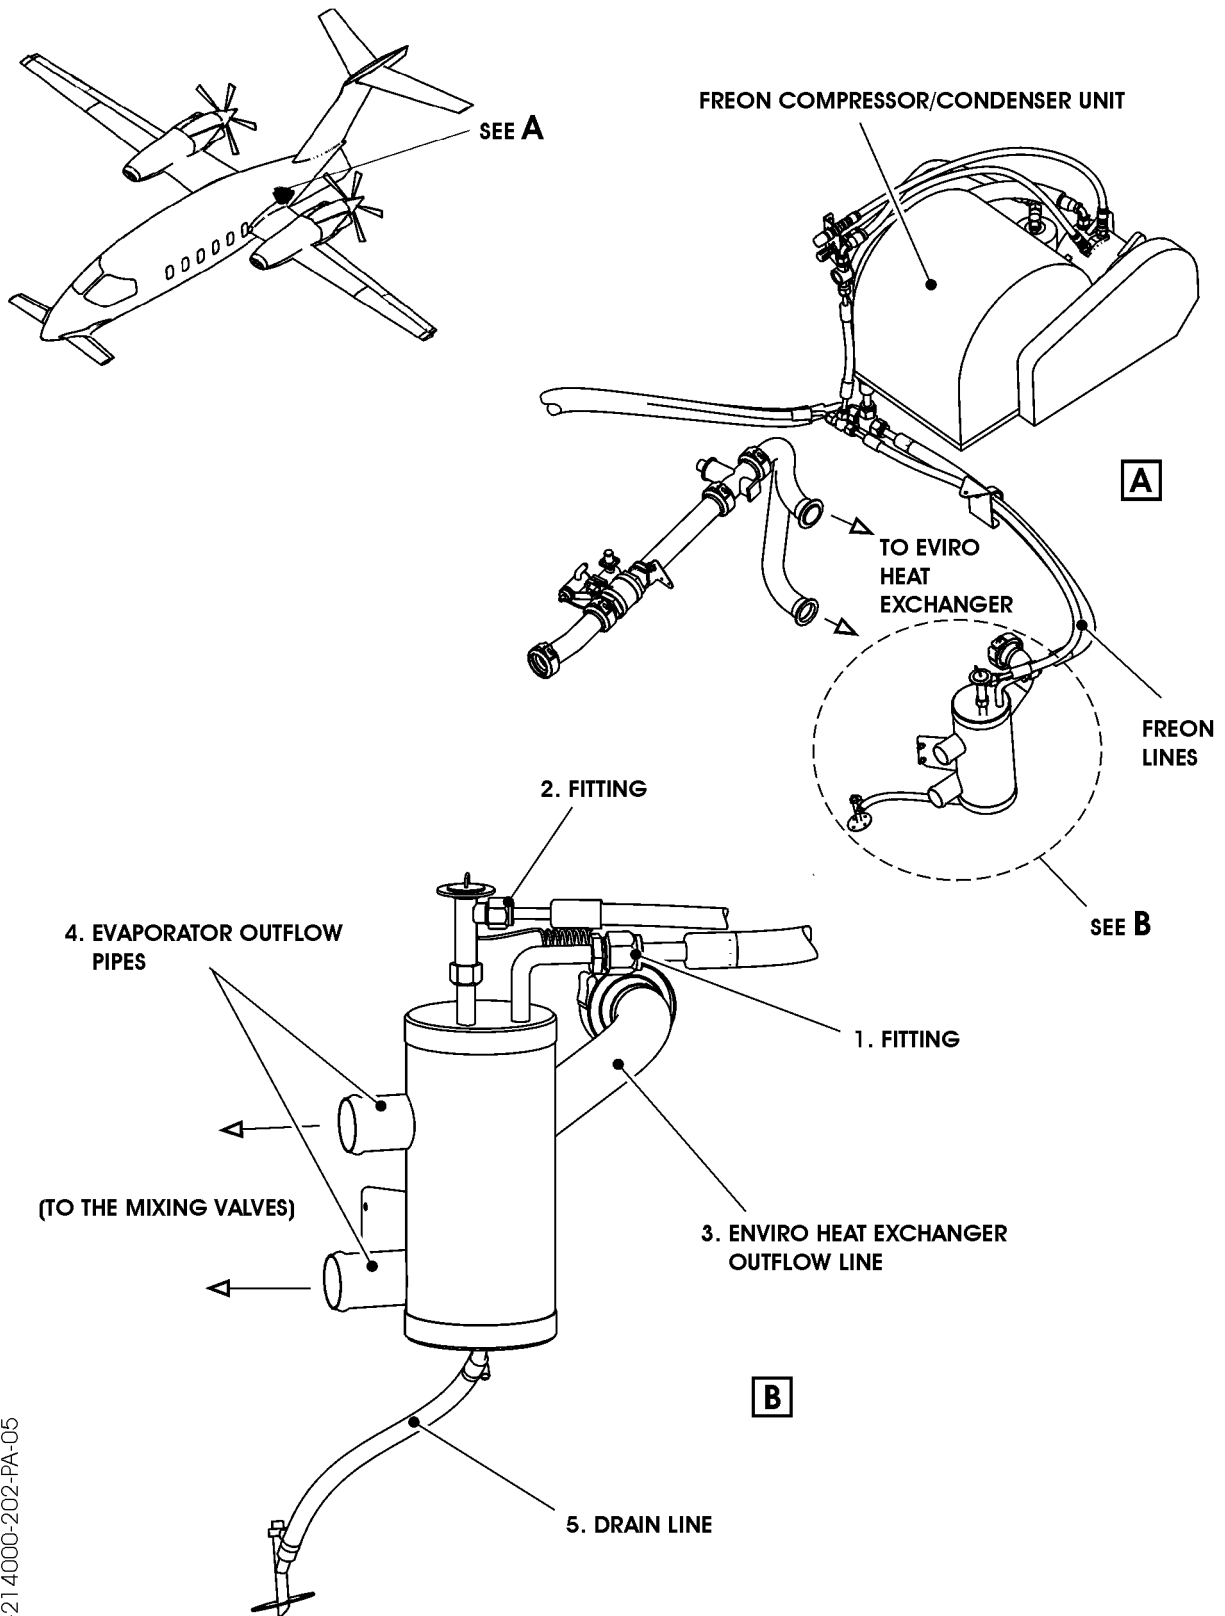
Enviro Heating Package - Removal/Installation (Sheet 2 of 3)
